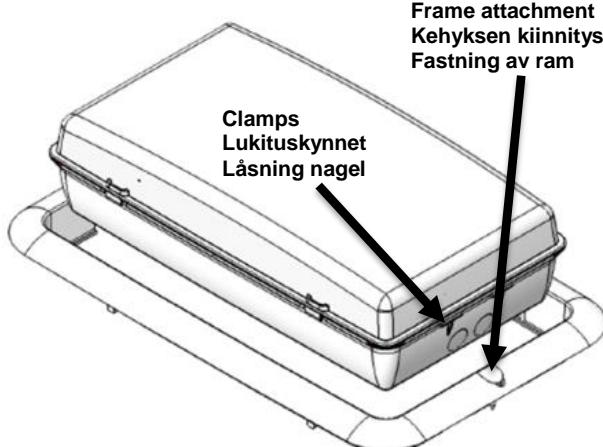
Recessed mounting, mounting hole 350 mm x 215 mm
